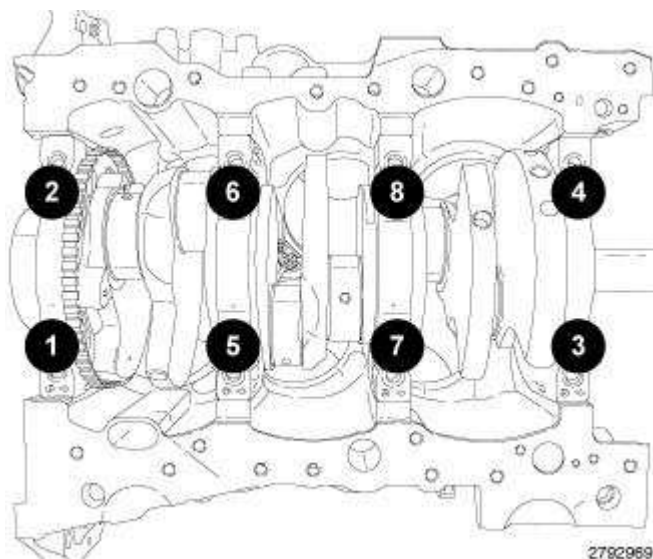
Main Bearing Cap Bolts Removal Sequence
